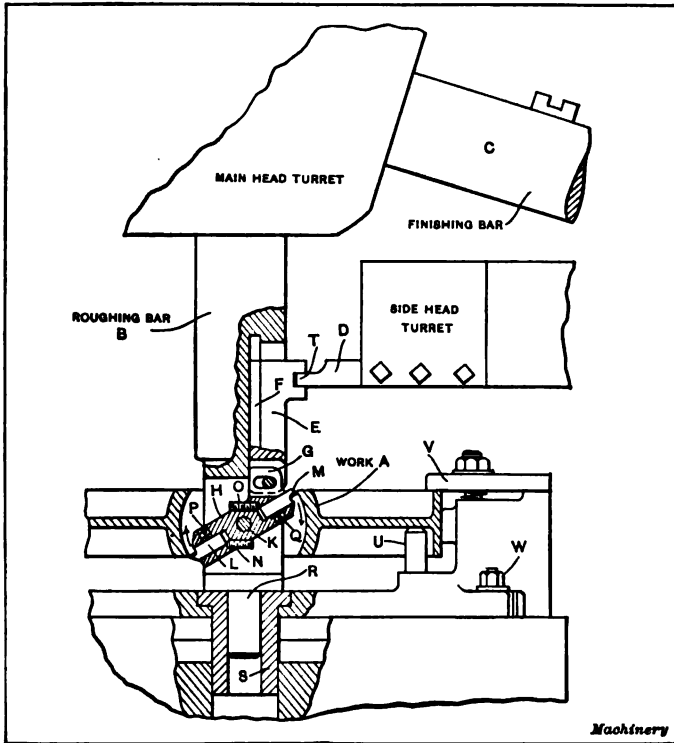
Radius Boring-bar for Vertical Turret Lathe
